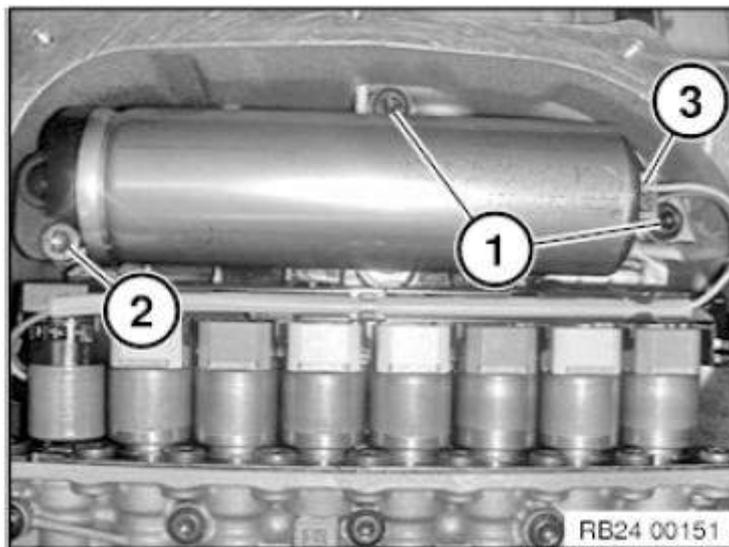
Identifying Oil Accumulator, Connector And Screw
